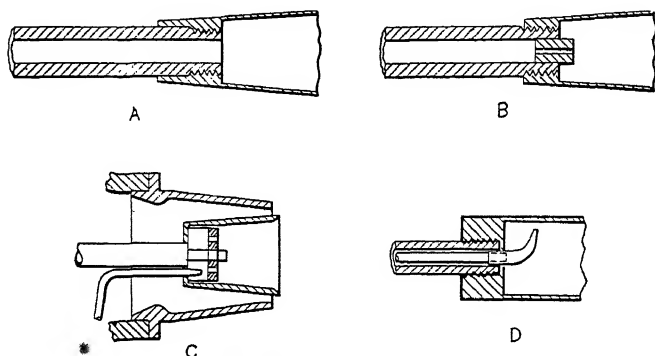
Methods of feeding oil to atomizer. A, oil feed to cup through hollow shaft, unrestricted opening; B, oil feed to cup through hollow shaft, drilled plug in opening; C, oil feed to cup through side tube; D, oil feed to cup through stationary tube in hollow shaft.
